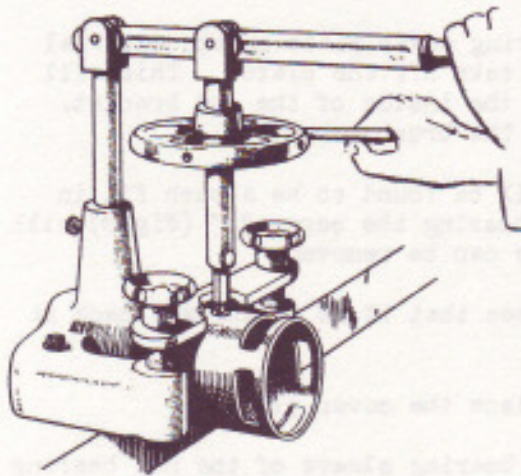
SHOWING TIGHTENING POLE SHOES WITH WHEEL OPERATED SCREWDRIVER.
